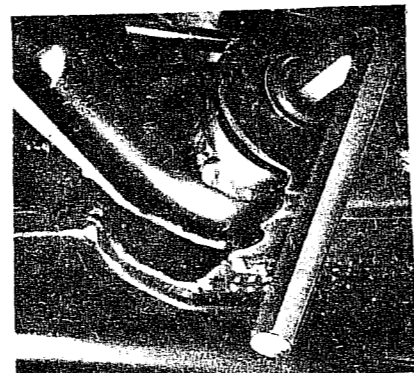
Removing the socket screw securing the trailing arm to its mounting bracket - D/J axle.
